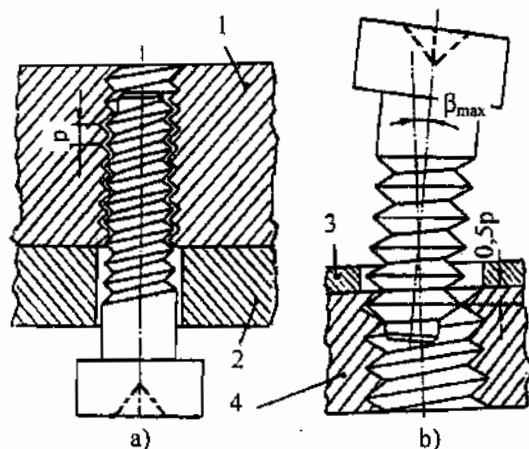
Limit Situations at Parts with Screw Threads Assembling
